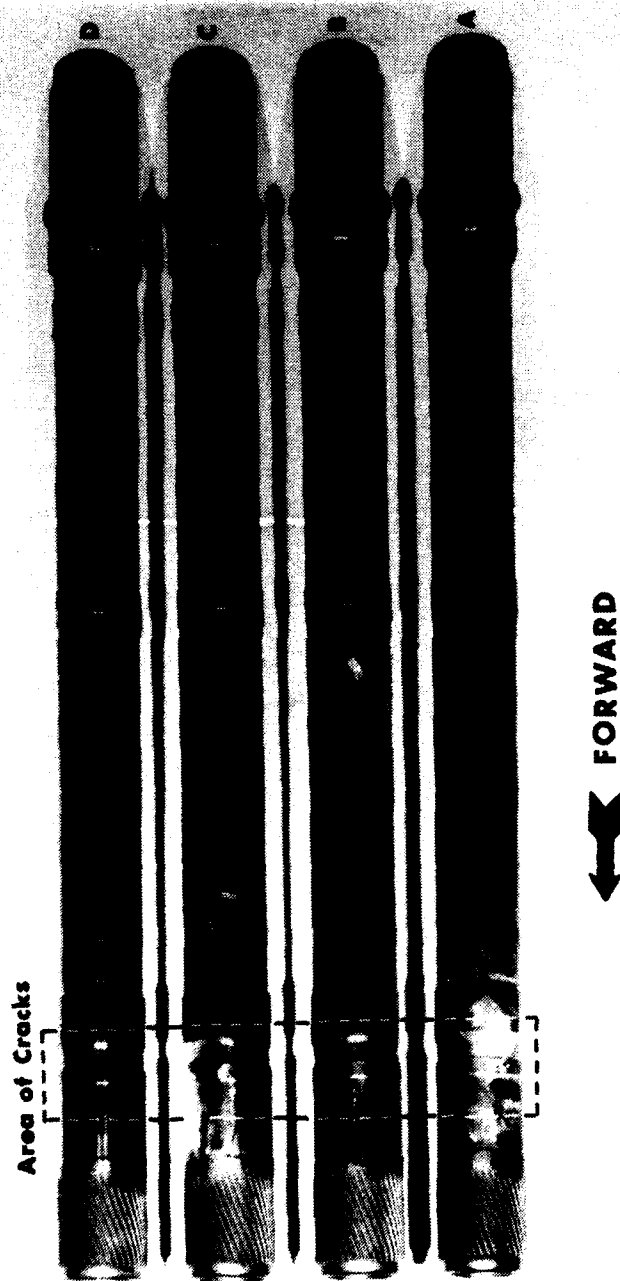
As received photographs of the L.P. Compressor Drive Shafts;
